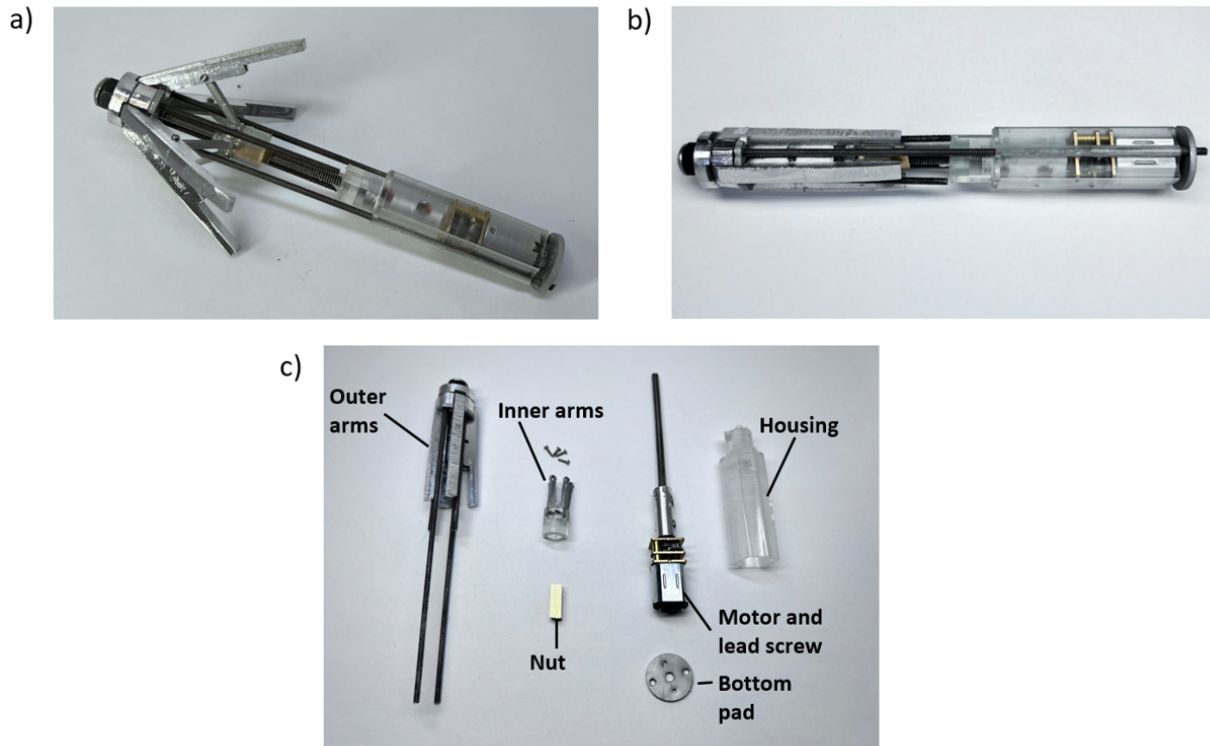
a) Expanded and b) collapsed state of the prototype. c) Prototype disassembled.
